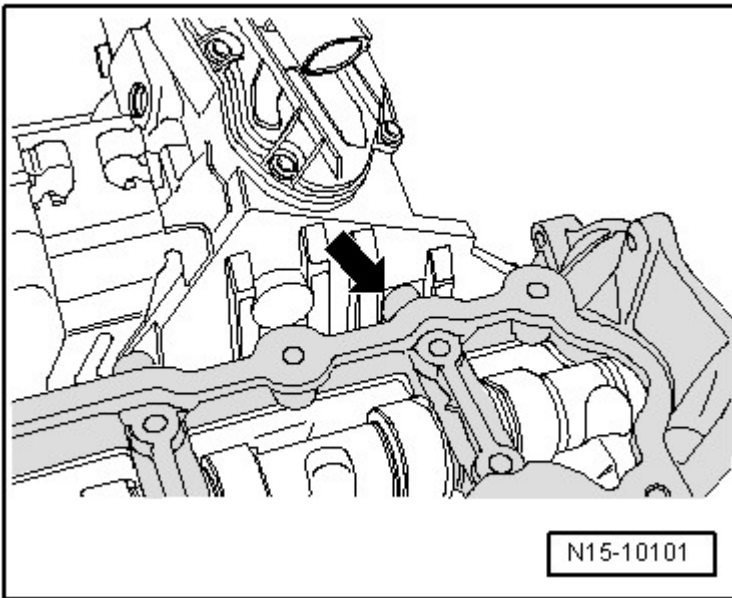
Setting Guide Frame In Place So That It Can Get By EGR Vacuum Regulator Solenoid Valve N18
